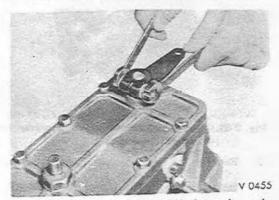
Removing the gear shift lever from the transfer case cover.
